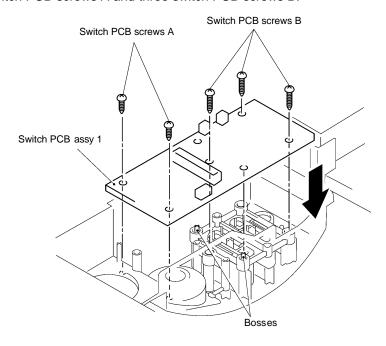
Installing the Switch PCB Assy (2)
